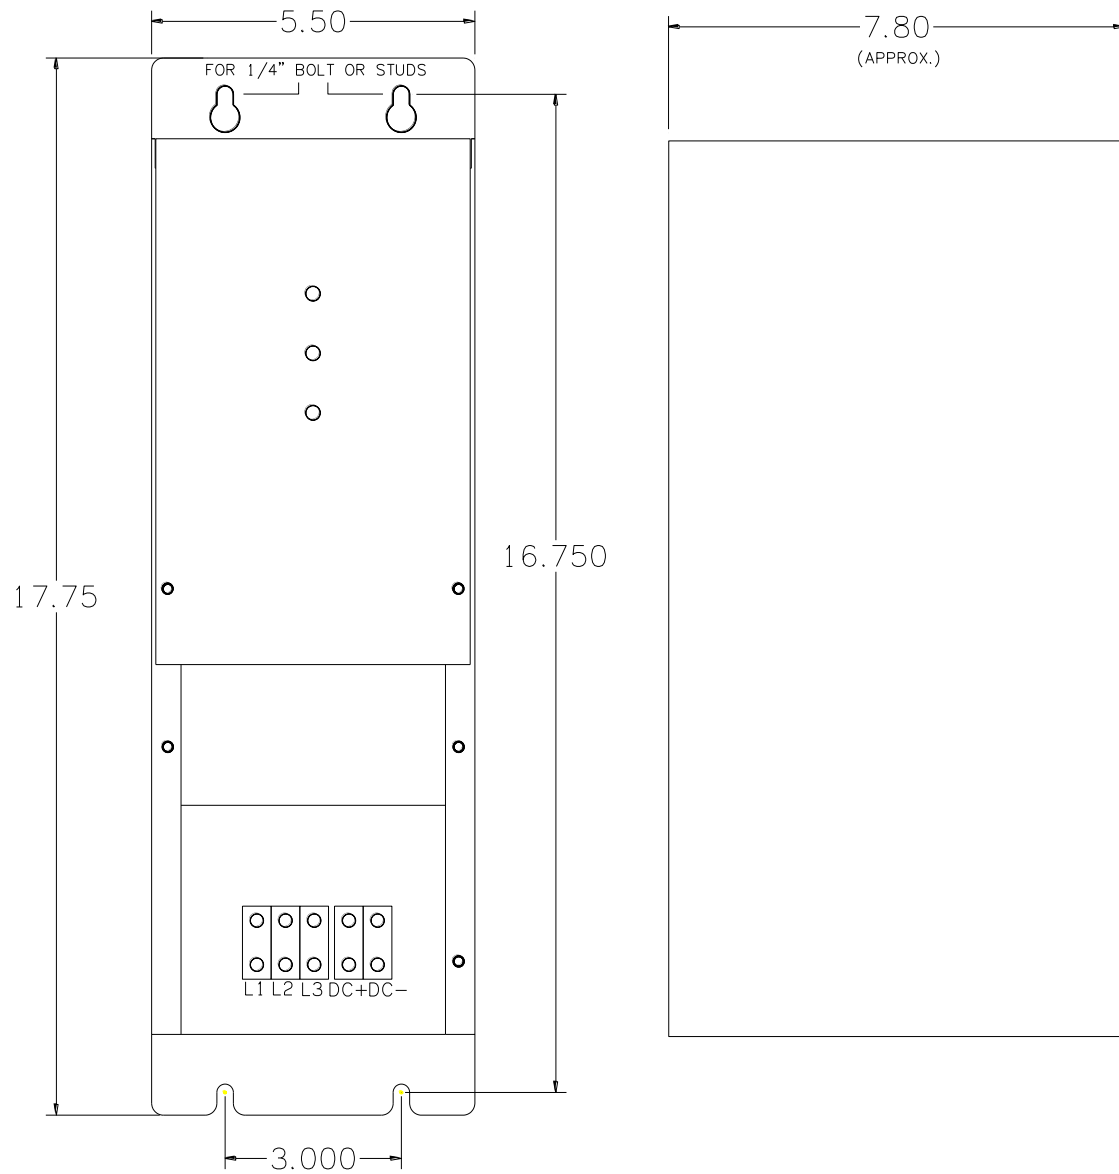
M3713SC K7 Chassis Dimensional Outline
